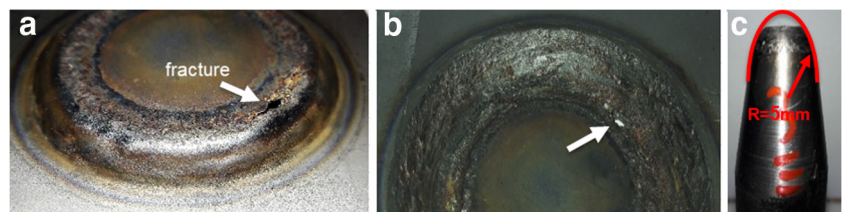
The aluminum formed part in experiment no. 7. a The outer appearance. b The inner surface. c The tool tip wear
